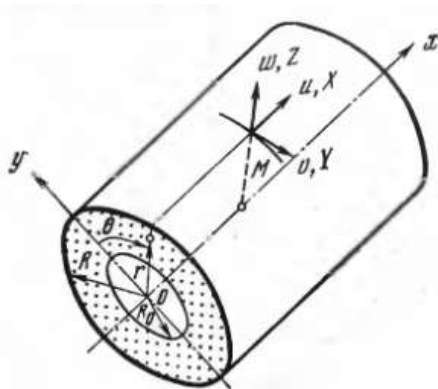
Geometric and force designation of the composite feed cylinder of rotor spinning machines.
